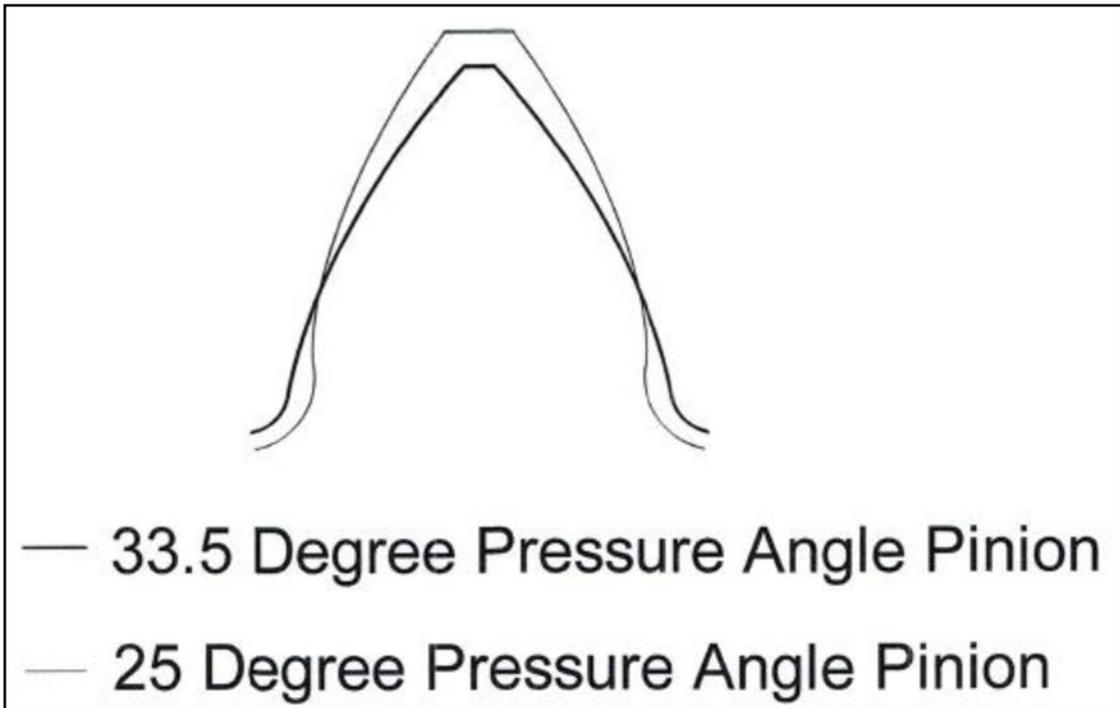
Reference 25 PA and 33.5 PA gear tooth profiles.
